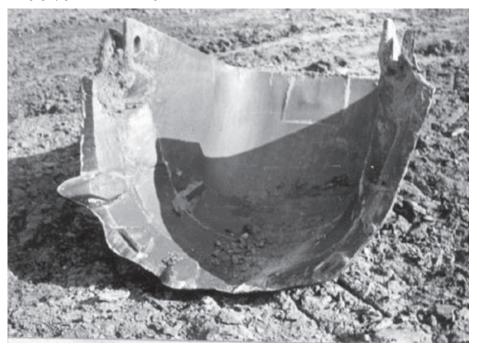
Fixed teeth after wear out - broken teeth and damage to the bucket knife Rys. 2. Zęby mocowania stałego po zużyciu - widoczne wyłamania zębów i uszkodzenia noża czerpaka
